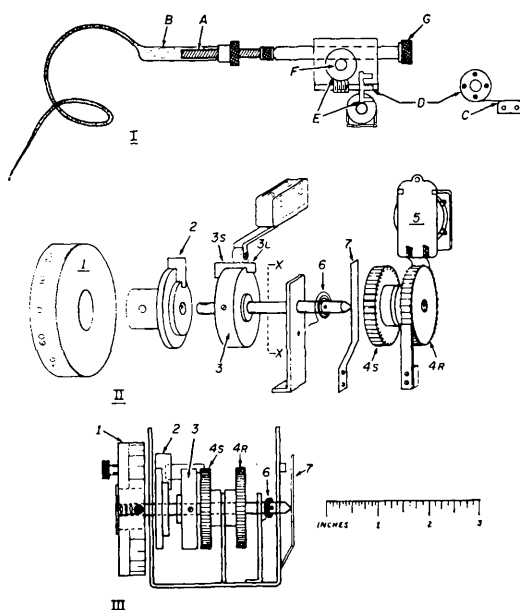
Details of construction of pipetting machine; part I is shown half scale, parts II and III are shown full scale.
